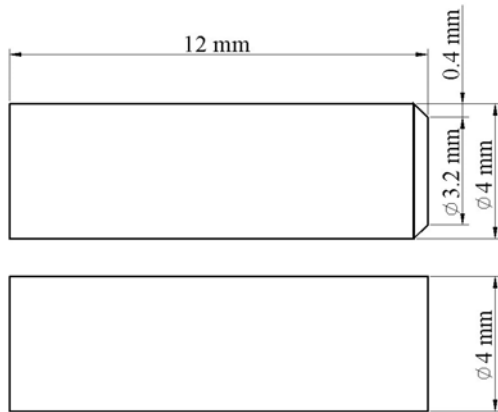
Dimension of specimen to be welded by friction method.
